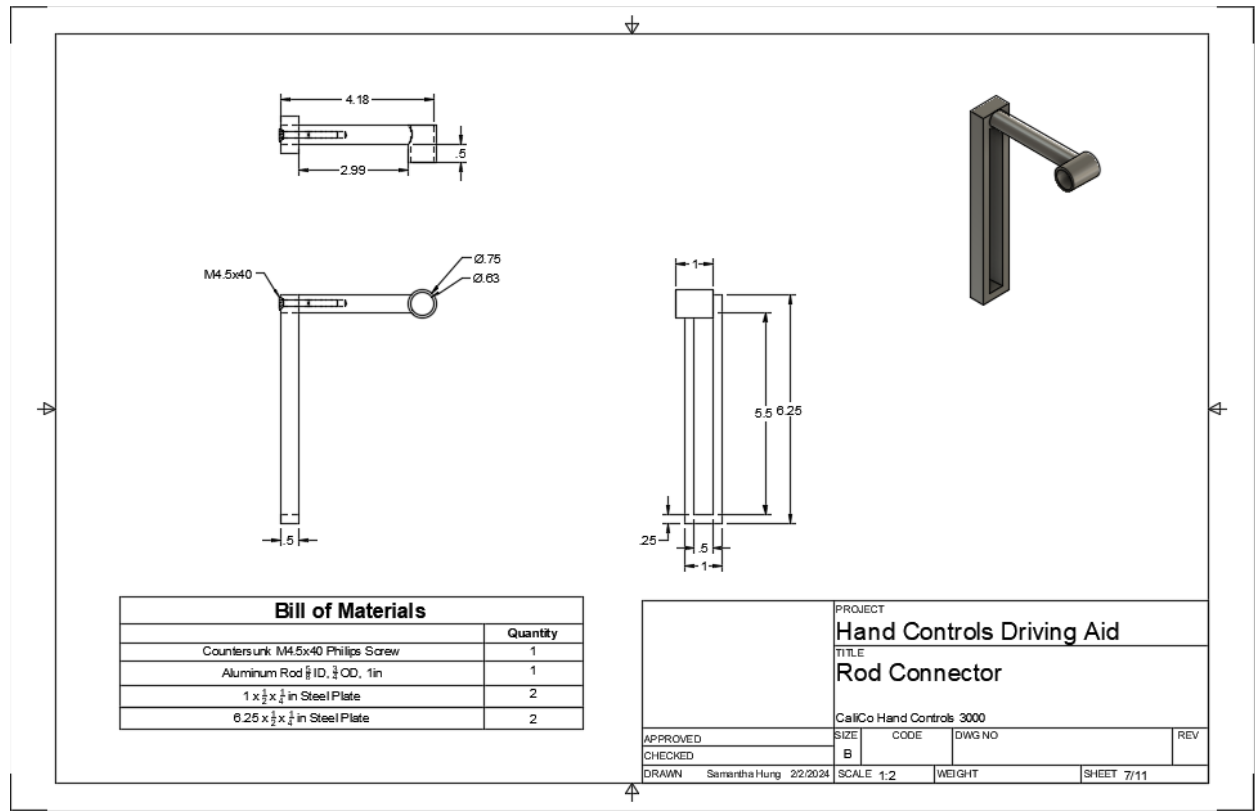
Detailed drawing and isometric view of the rod connector component
